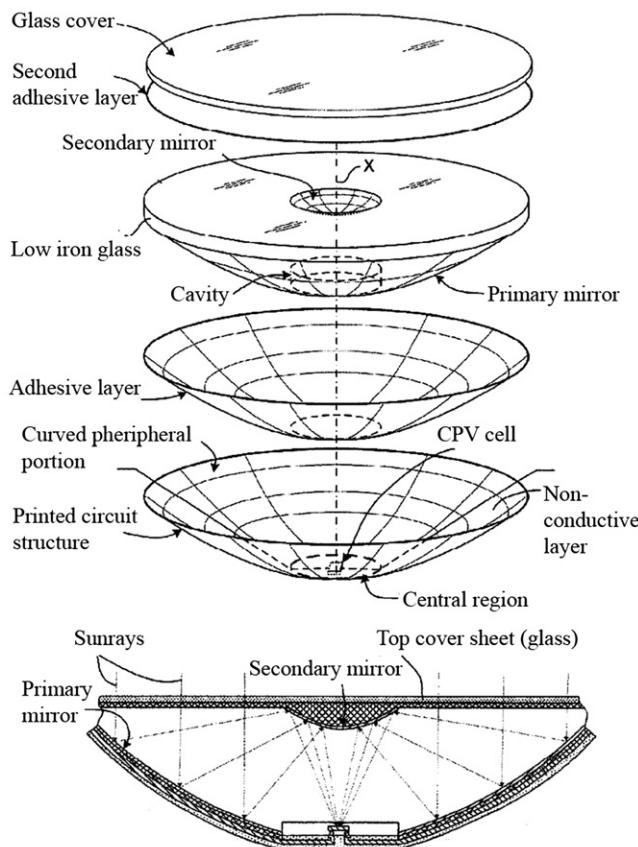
An exploded perspective view (upper diagram) and a cross-sectional side-view (lower diagram) showing a laminated solar concentrating photovoltaic device.
